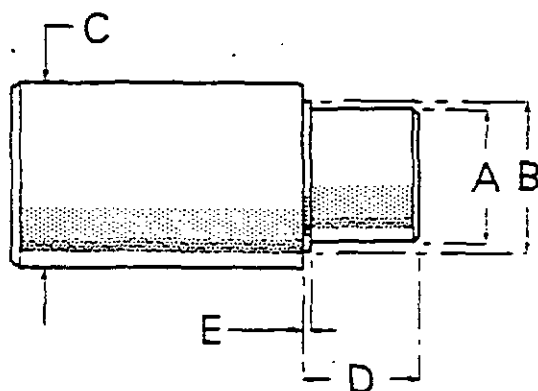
TOOL FOR FITTING DRIVESHAFT BUSH (TWELVE-SPEED)
